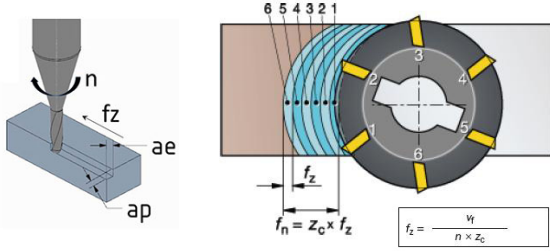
Left: example of radial ( $a_e$ ) and axial ( $a_p$ ) depth for the generated cut using the cutting tool. Right: example of a cutter tool with  $z_c = 6$  teeth, spindle speed  $n$ , feed per tooth  $f_z$  and feed tool per minute  $v_f$  in relation to the material.
